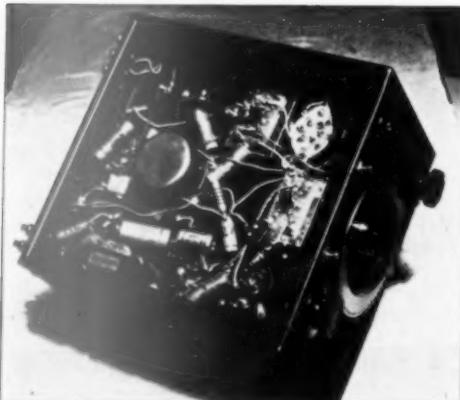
A SUGGESTED CHASSIS LAY-OUT
